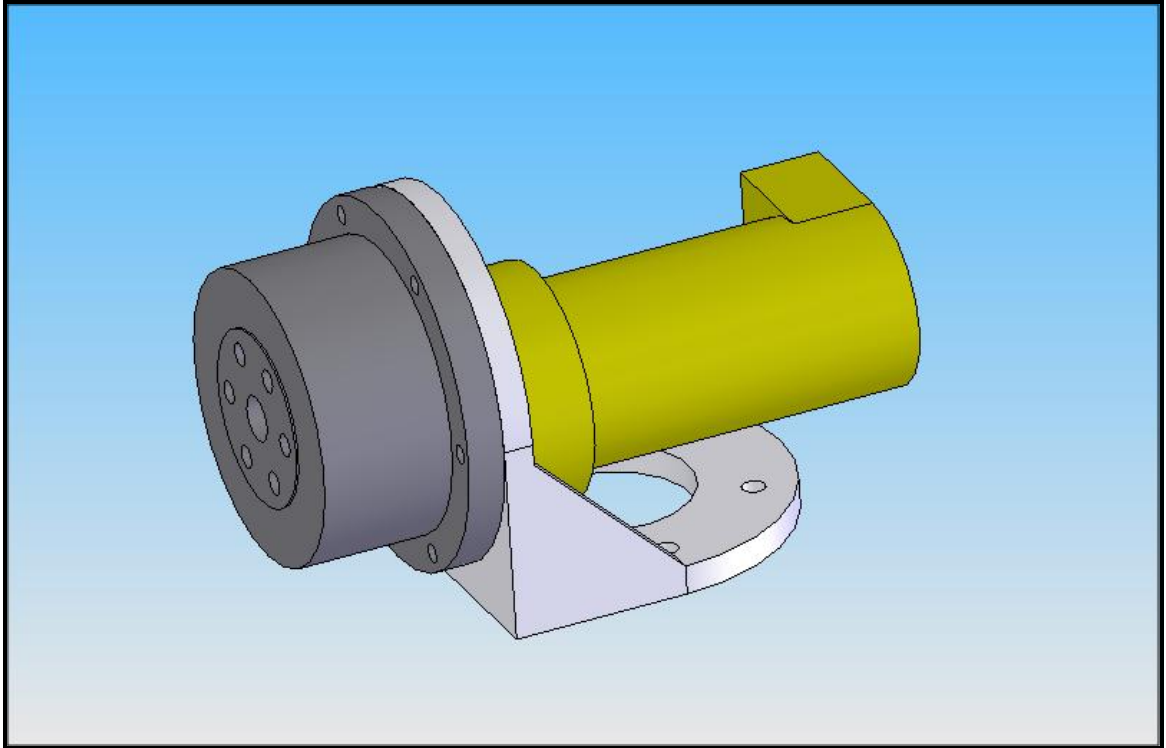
Typical Joint Design, Showing Motor, Gearhead and Bracket
